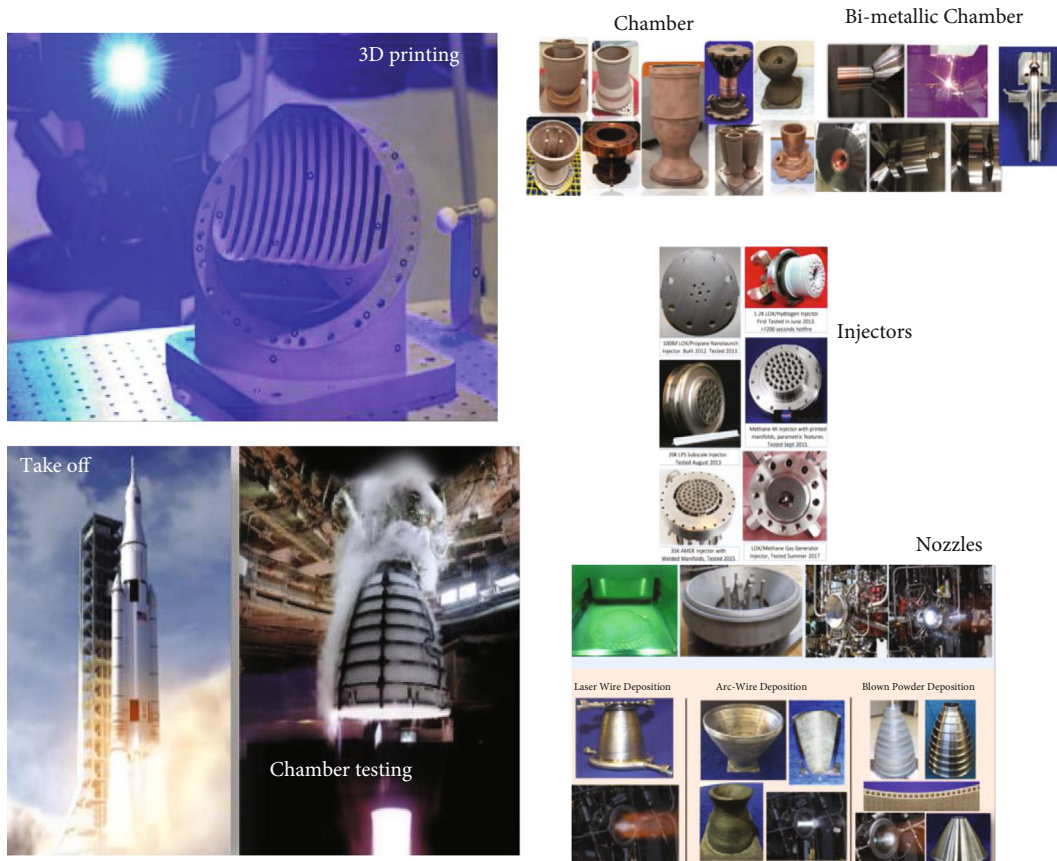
Engine parts are 3D printed [53]. (Courtesy: NASA).
